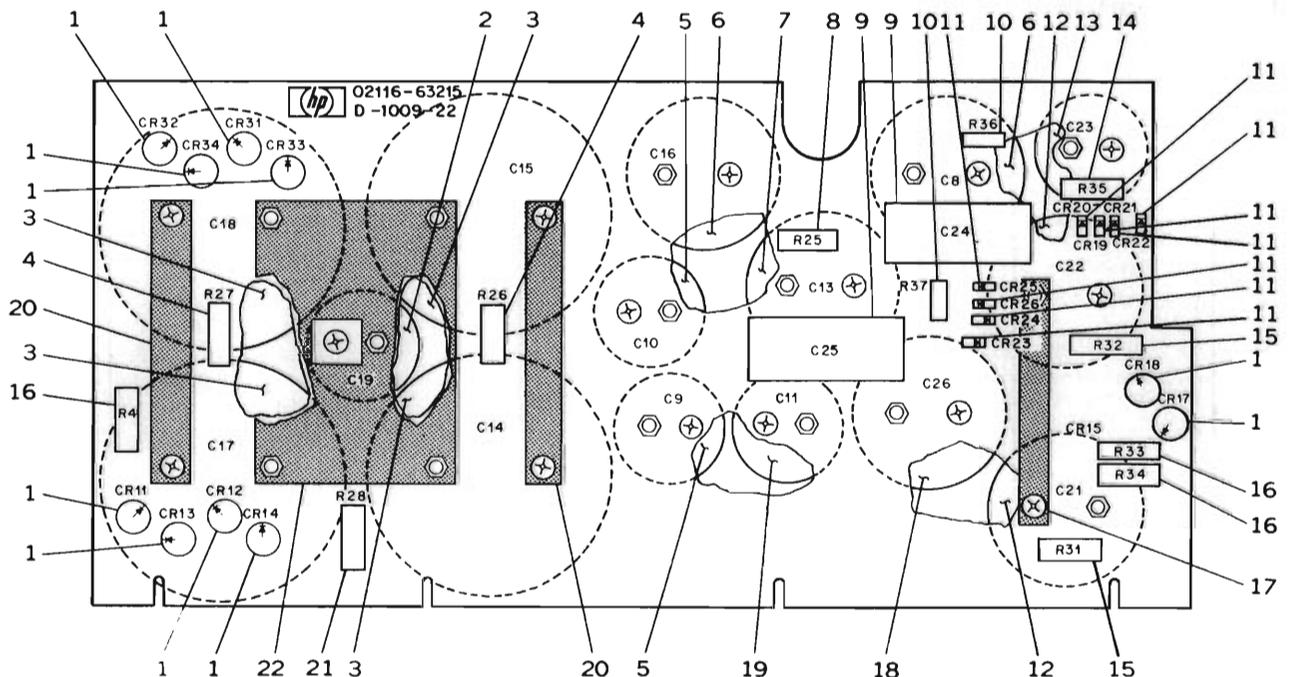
A306, A307, A310 Component Board Assemblies, Replaceable Parts
